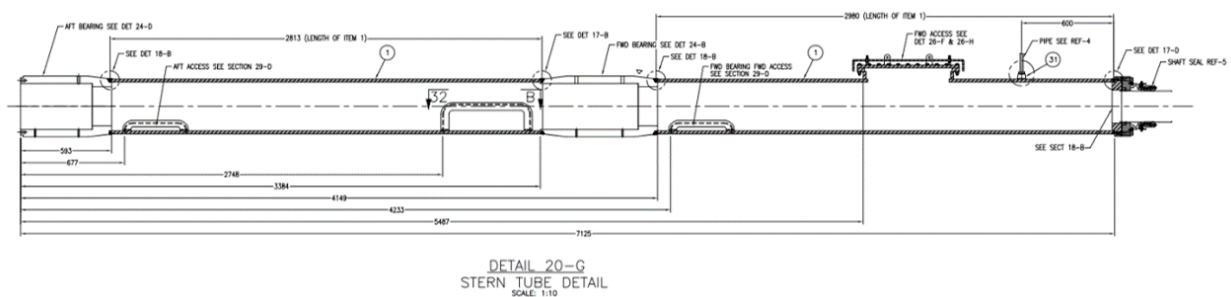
Drawing of the FRC stern tube showing the bearings and inspection covers.
